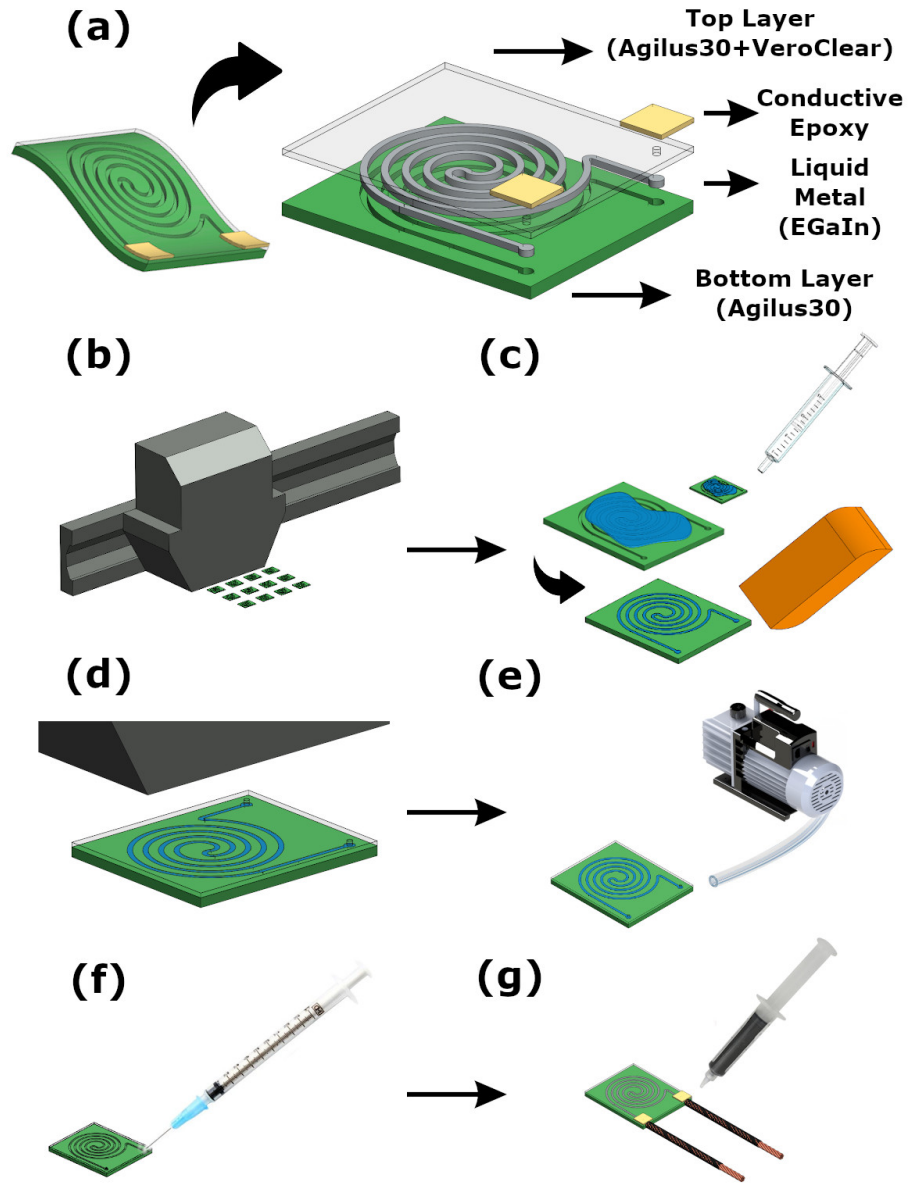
Design and fabrication steps of the 3D-printed pressure sensor embedded with LM. (a) The sensor components: a bottom layer made of pure Agilus30, a top layer made of Agilus30 and VeroClear mixture (70A Shore Hardness), a microchannel structure for filling with liquid metal (EGaIn), and two end terminals encapsulated with conductive epoxy; the fabrication steps were: (b) 3D-printing of the bottom layer with microchannel cavities of cross-section size $350 \times 350 \mu\text{m}$, (c) manual dispersion of the glycerol-IPA mixture, (d) 3D-printing of the top layer with outlets at each end, (e) vacuum-based removal of liquid sacrificial layer, (f) manual injection of EGaIn, and (g) encapsulation of both terminals and soldering of copper stranded wires with conductive epoxy.
